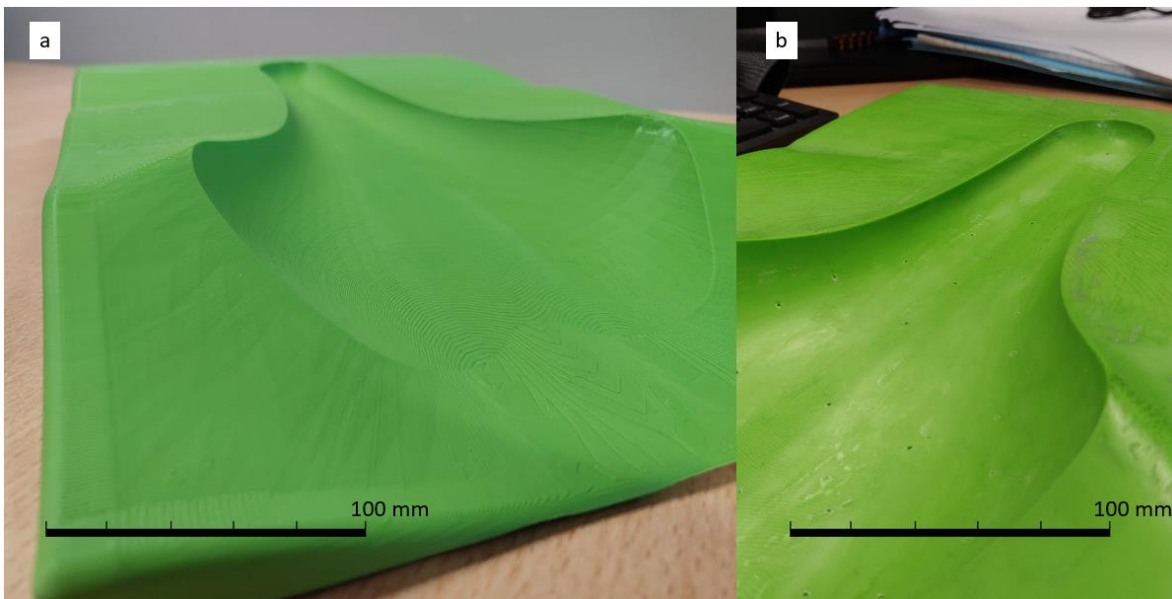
(a) Block Tool for infusion directly off the printer. (b) Block tool after receiving epoxy sealer and drilled with 1mm diameter holes for thermoforming.
